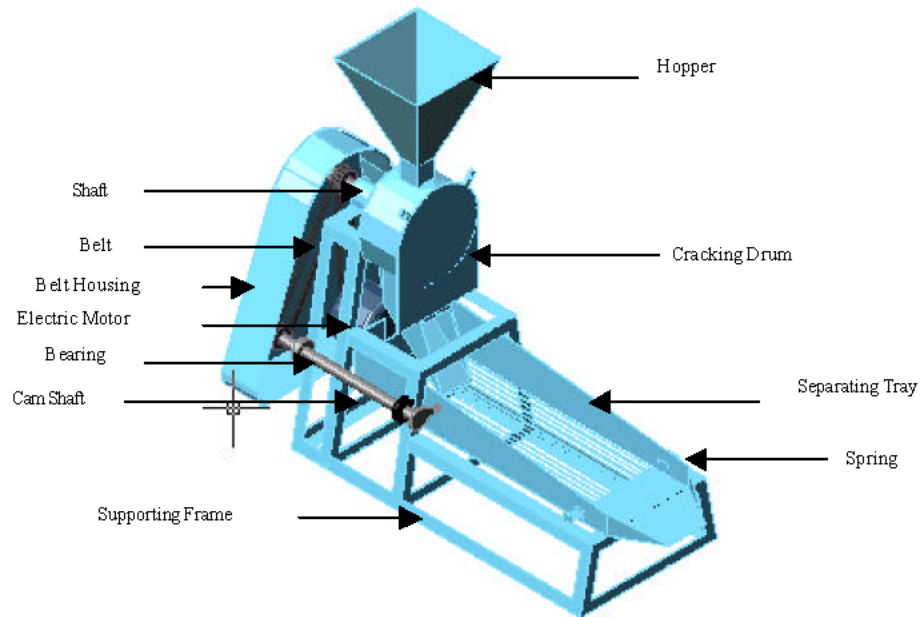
Isometric drawing of indigenous dual kernel cracker processing machine
